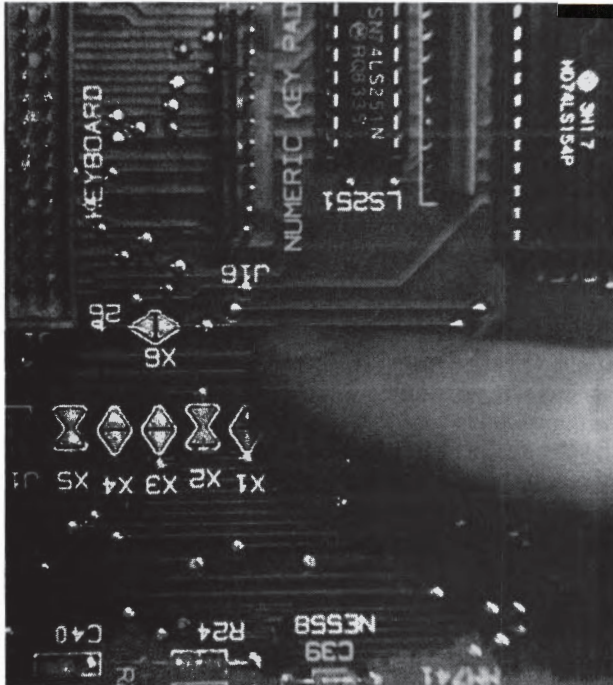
The //e keyboard and numeric keypad connectors. If you use a slot 3 80 column board instead of a //e auxiliary slot card, you may need to do the shift key mod by putting a drop of solder on the "X6" jumper. The X6 jumper is already connected on Revision A //e's.
